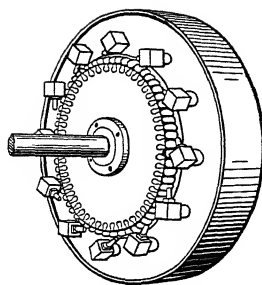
WHEEL AND NOZZLE OF KERR TURBINE.
